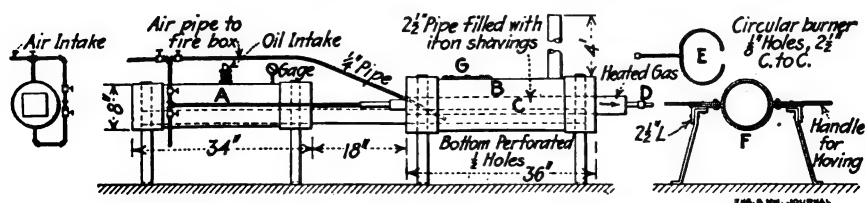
DEVICE FOR HEATING ROLL SHELL.
